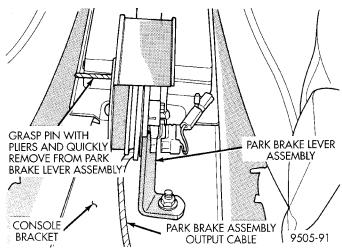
Removing Lockout Pin From Park Brake Lever Assembly
